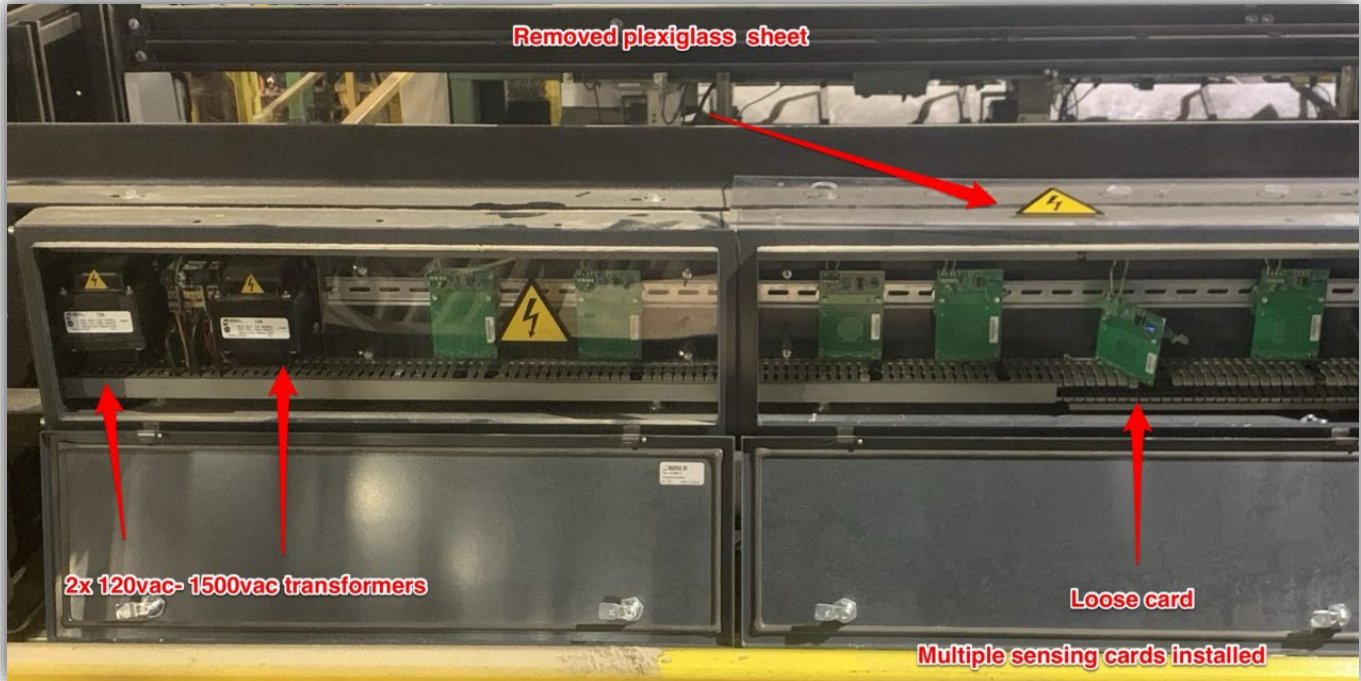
Front view of the machine - Locations of transformers, various sensing cards and exposed metal brushes that make contact with veneer sheets during process.
